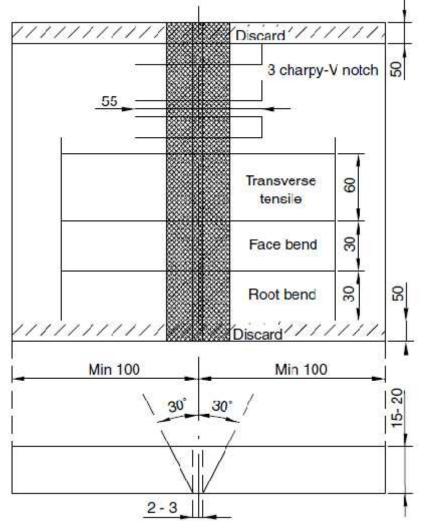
Butt weld test assembly (All the dimensions are in mm, unless otherwise indicated.)
